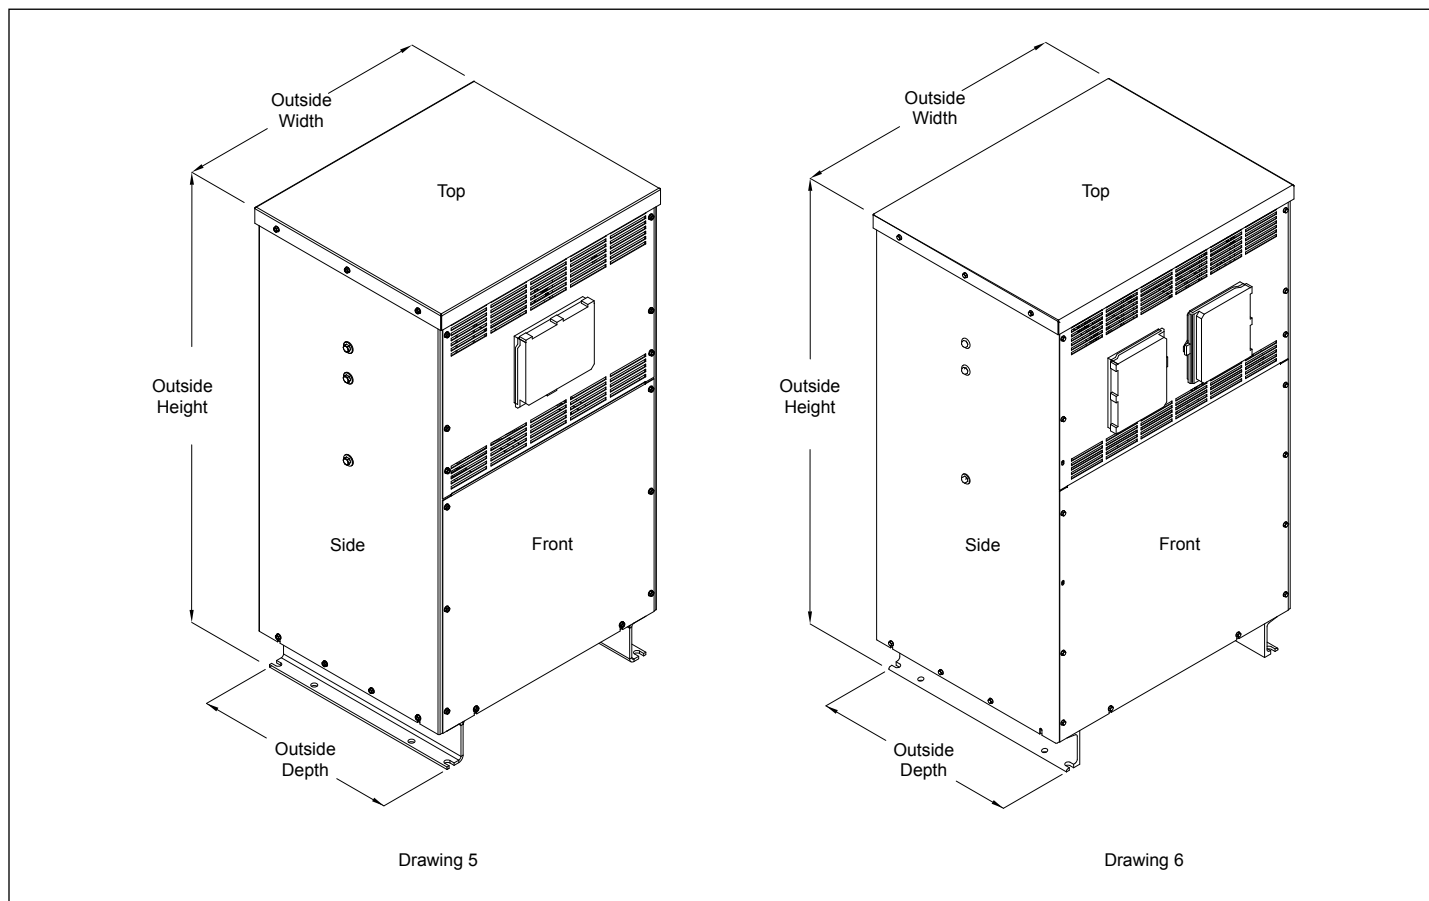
Enclosure Dimensional Drawings—General Purpose Ventilated Transformers
